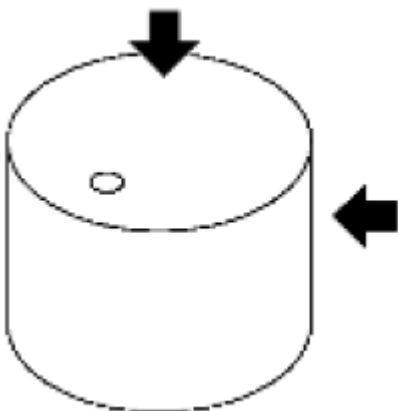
Checking Surface Of Valve Lifter Or Cracks
